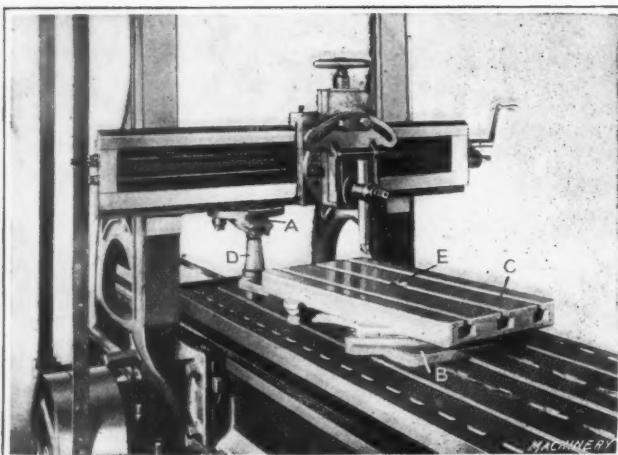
H. B. Underwood & Co.'s Radius Attachment for Planer
